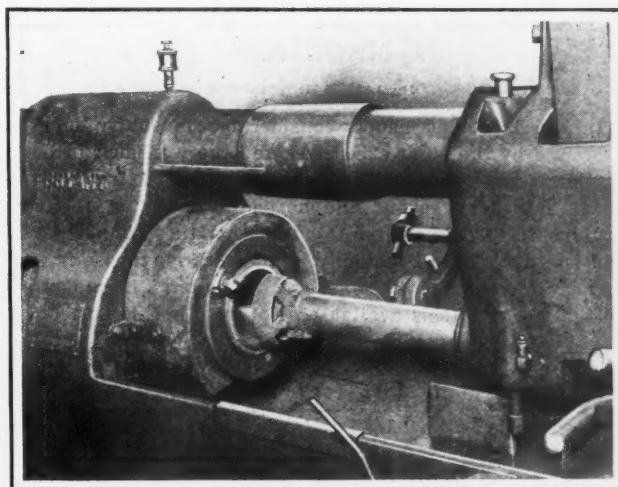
Last Machining Operation, which consists of finish-grinding the Bore
